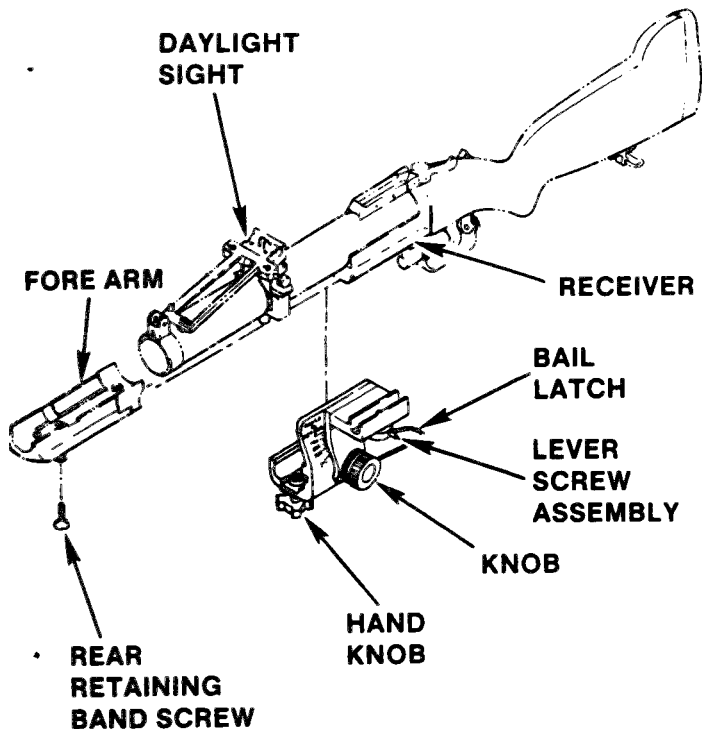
Installation of Mounting Bracket Assembly, M79.
